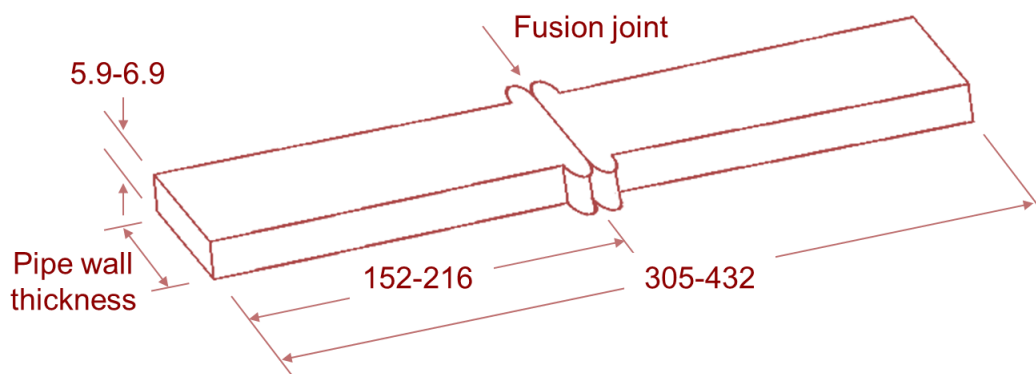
Guided side bend test specimen geometry adapted from ASTM F3183-16 (2016d)
